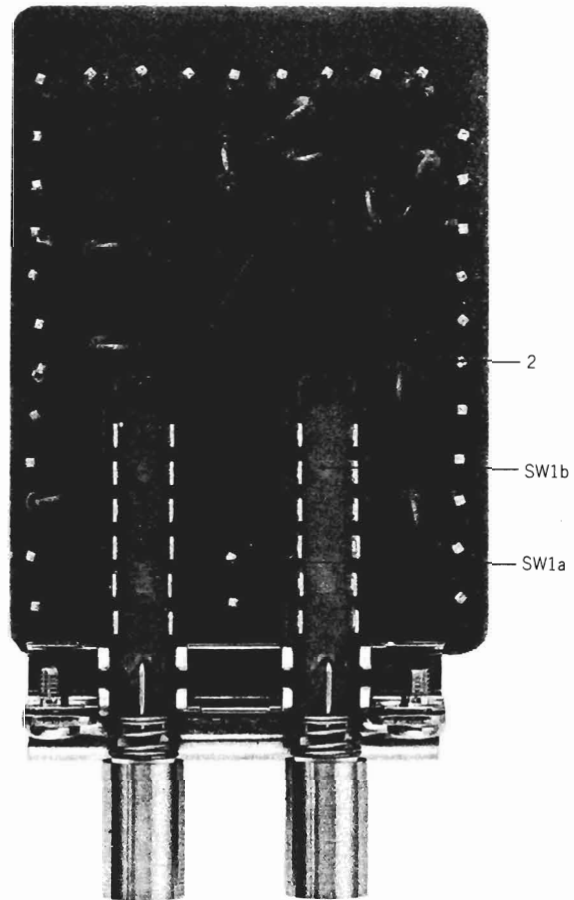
PHOTO OF TAPE P.C. BOARD (96-5001) BLOCK
